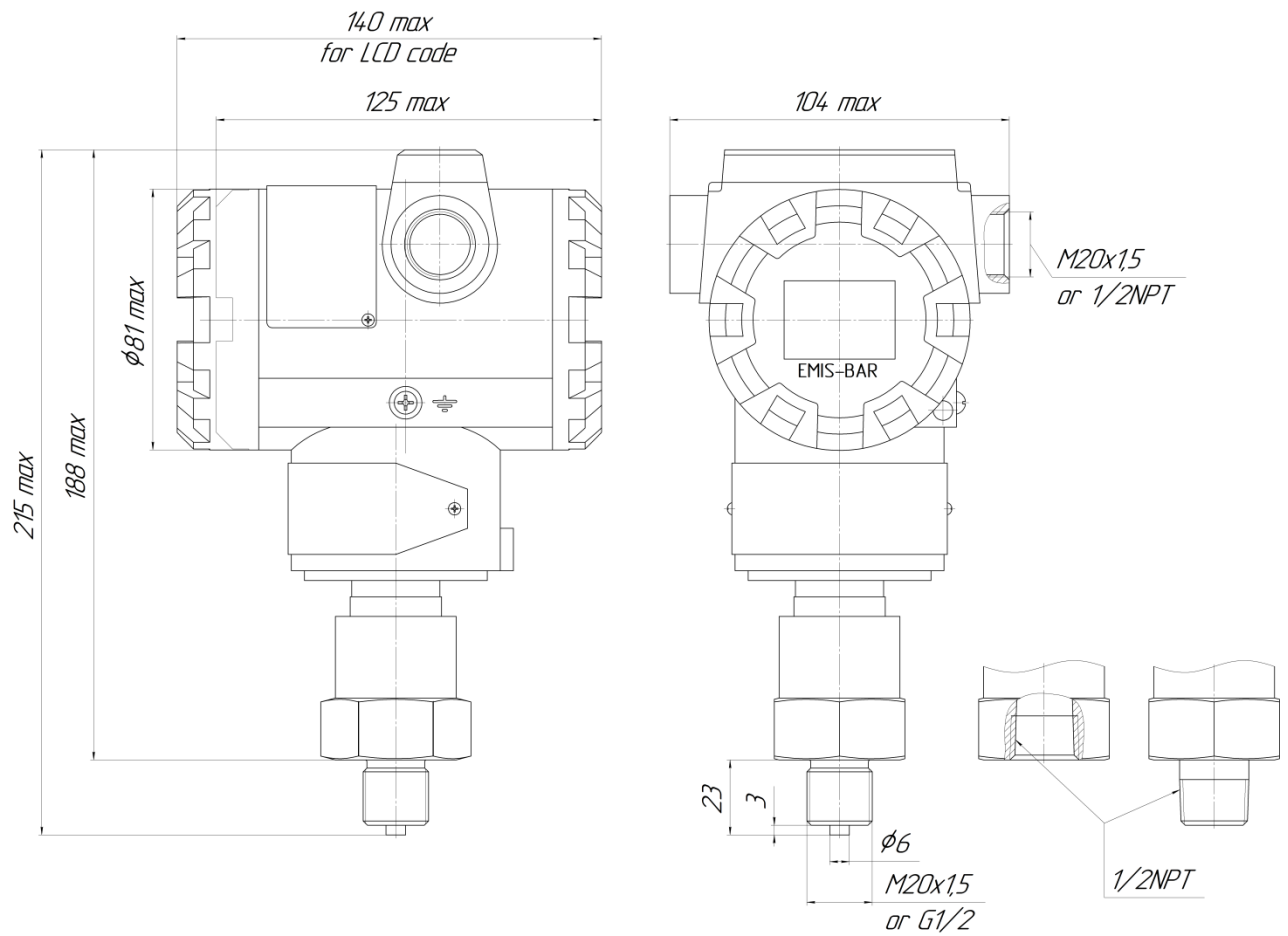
Dimensions and connection sizes of in-line mount pressure transmitters EMIS-BAR 103 and 123
